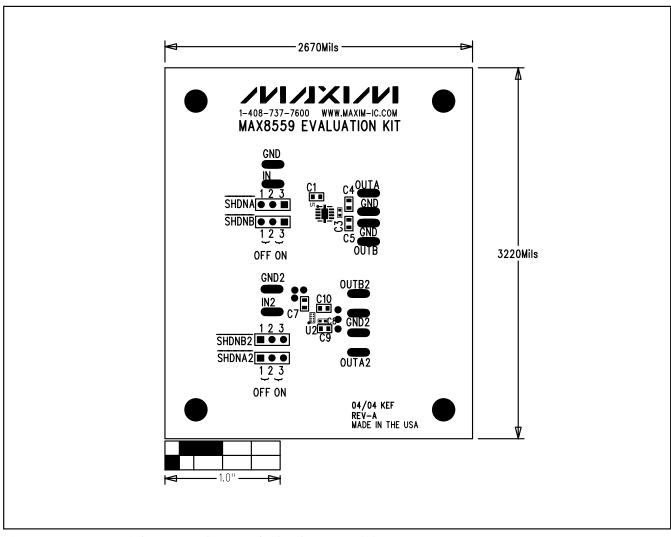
MAX8559 EV Kit Component Placement Guide—Component Side
